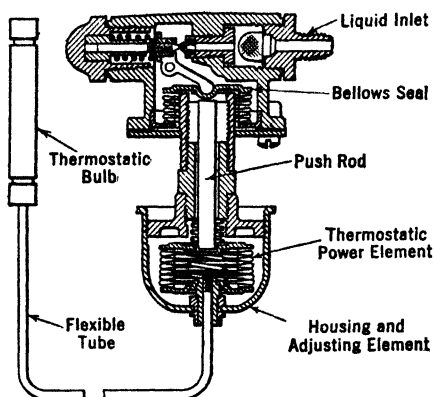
·2. Pressure-reducing valve with thermostatic bulb.
